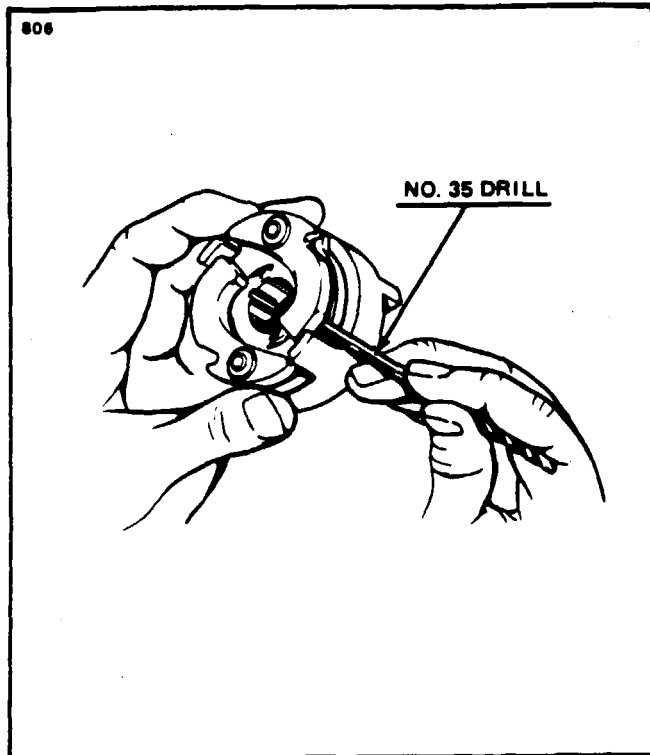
Checking Flyweight Axial Wear with Drill Shank
